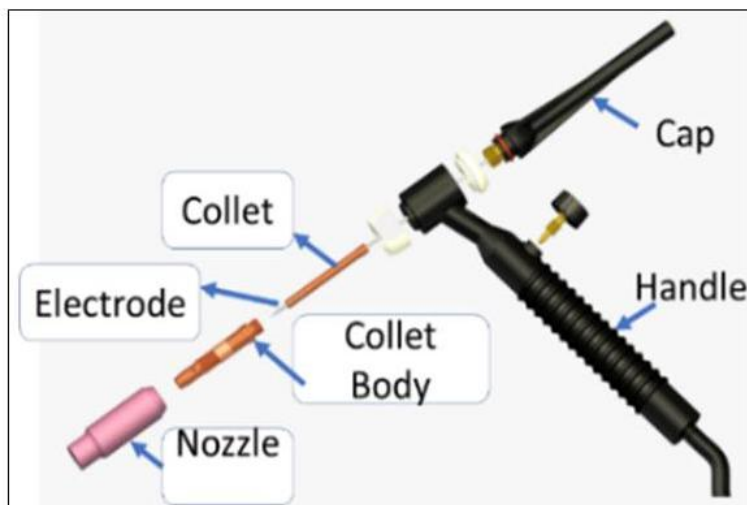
TIG welding process torch schematic diagram [Rana et al., (2017)]
